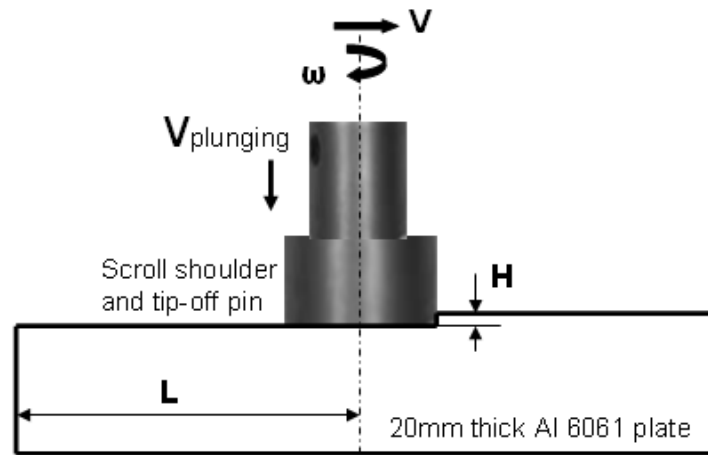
illustrates trial 'B', which was implemented to study how the depth of shoulder penetration influenced the mass of PUM during tool shoulder plunging. To achieve this, four welds (welds 3, 4, 5 and 6) were made using *tool 2* at four different depths of shoulder penetration.
